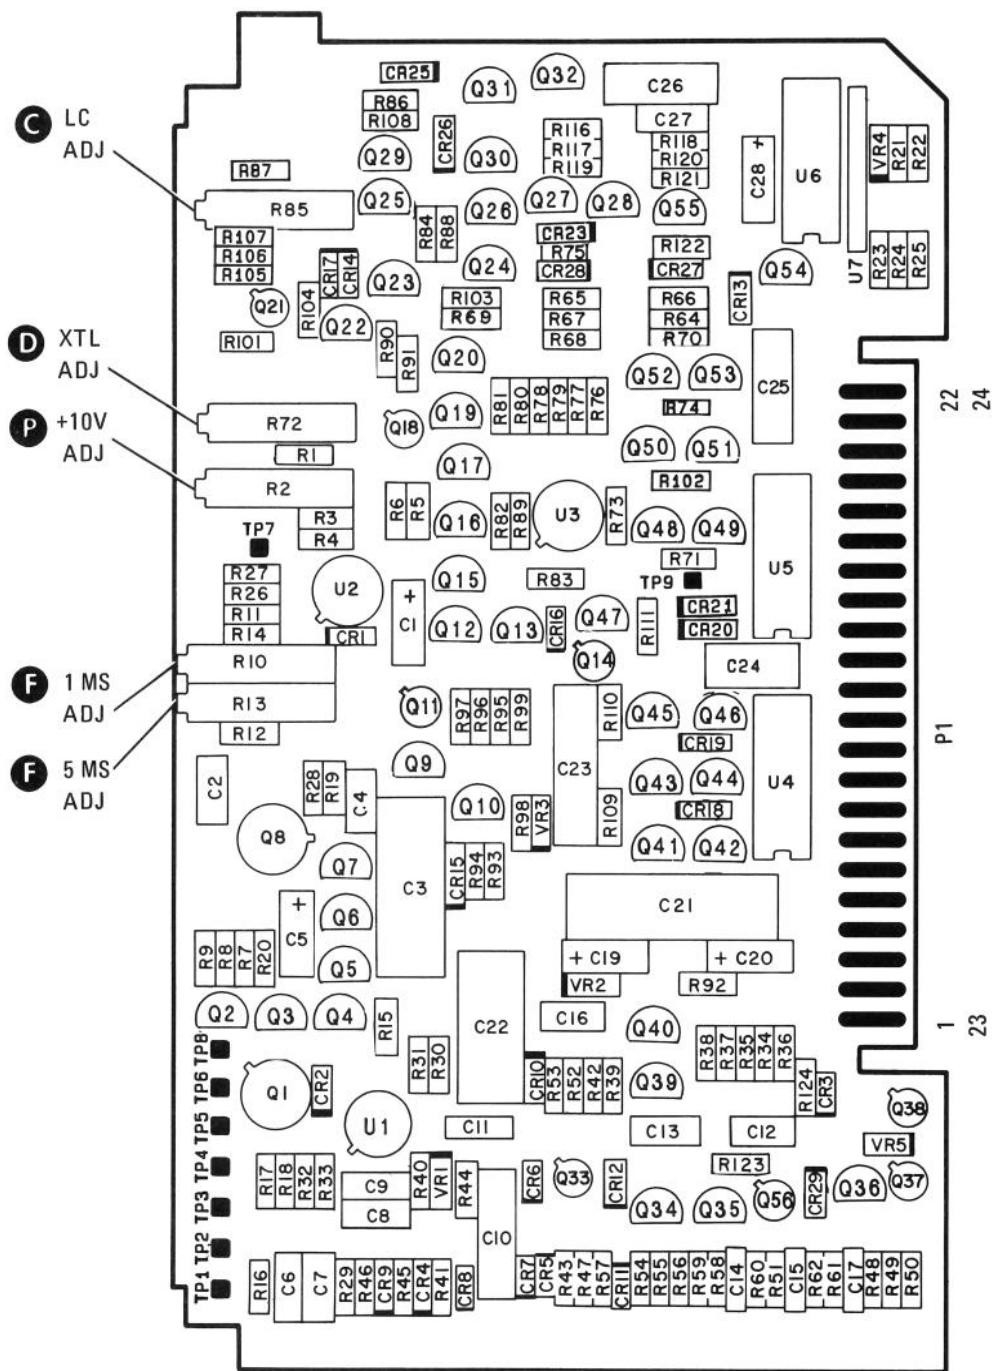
A8 SWEEP GENERATOR ASSEMBLY, COMPONENT LOCATIONS
